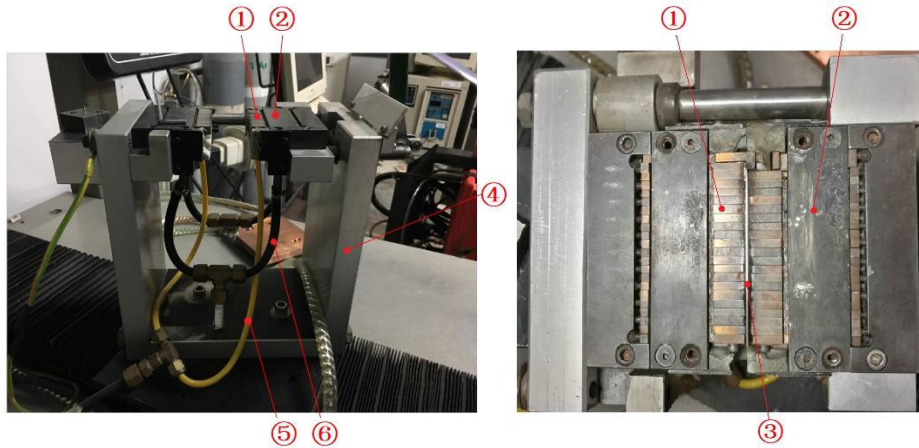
MPAW repair fixture: ① Movable copper bonds. ② Clamping structure. ③ Welding test piece. ④ Aluminum frame. ⑤ Protective gas pipeline. ⑥ Coolant pipeline.
